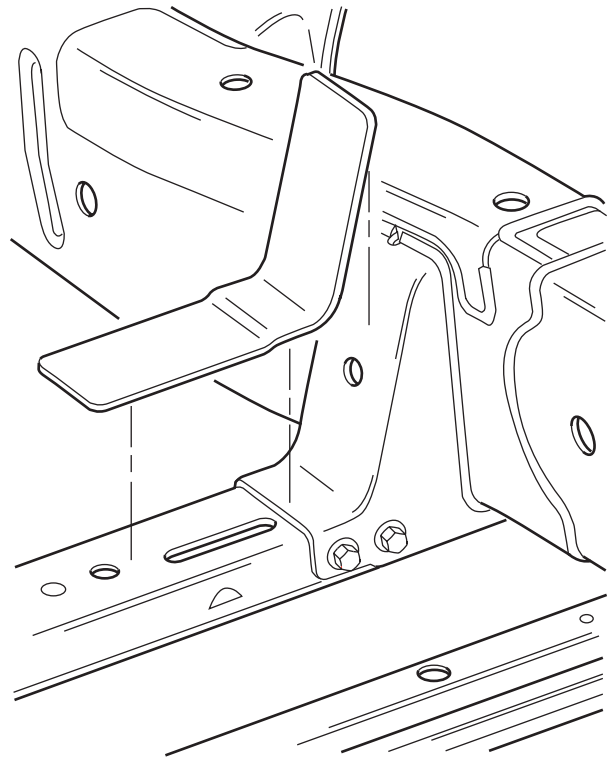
REMOVE CLEAR BACKING FROM SHIELD PRIOR TO INSTALLING. THE FOIL FACE FACES AWAY FROM THE FRAME RAIL.
